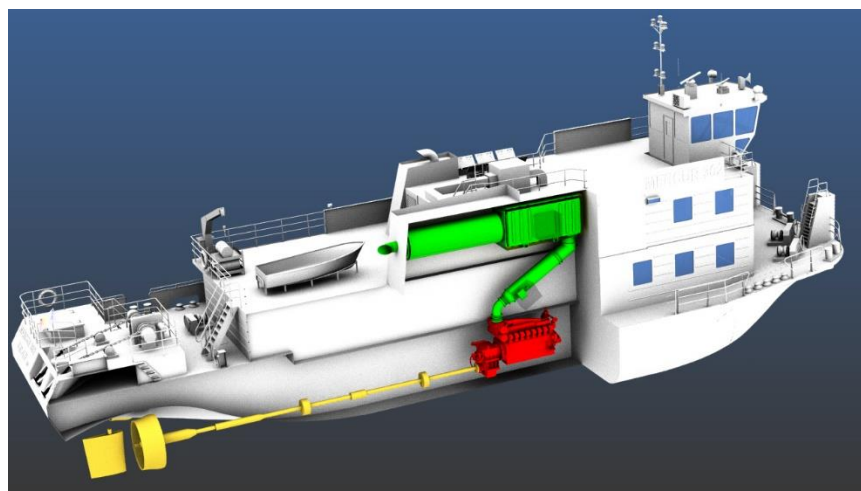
Type 1 pusher – 3D view, Mitsubishi engine, new gearbox and EATS
